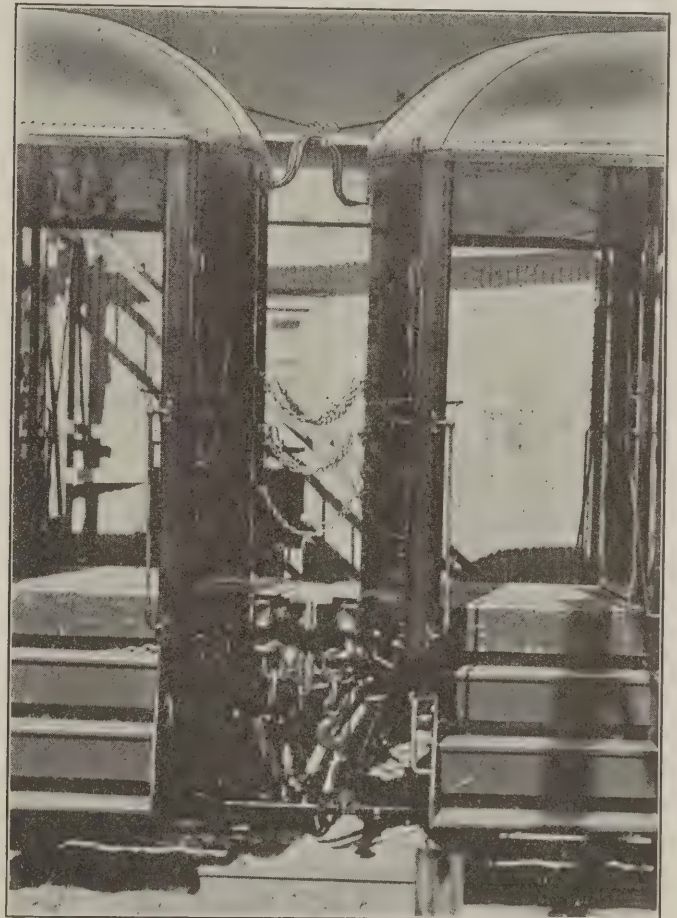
Train Line Connectors Are Supported by Special Coil Springs Holding Up the Slack
